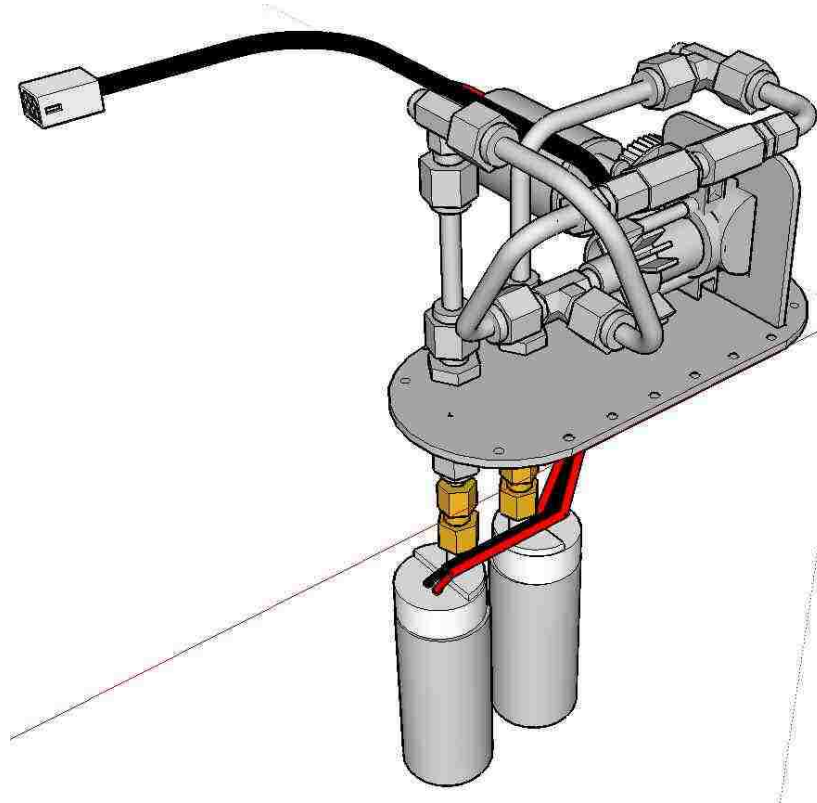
3D Rendering of Dual Obscurant Sprayer Pump Assembly for Prototype Generator
